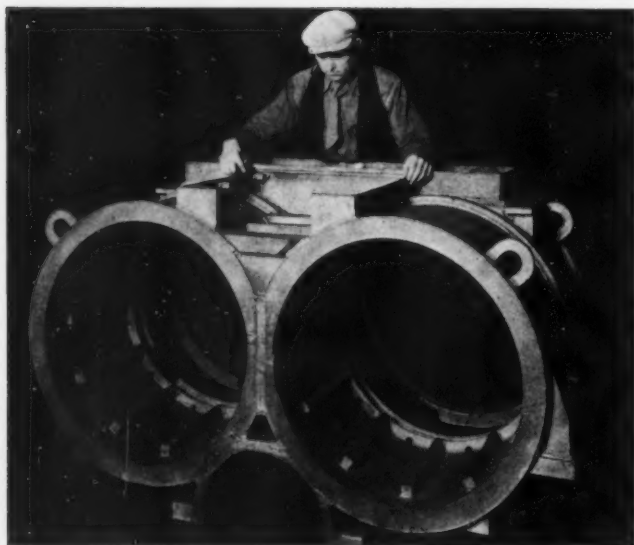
FRAME INSPECTION AFTER WELDING AND STRESS RELIEVING
